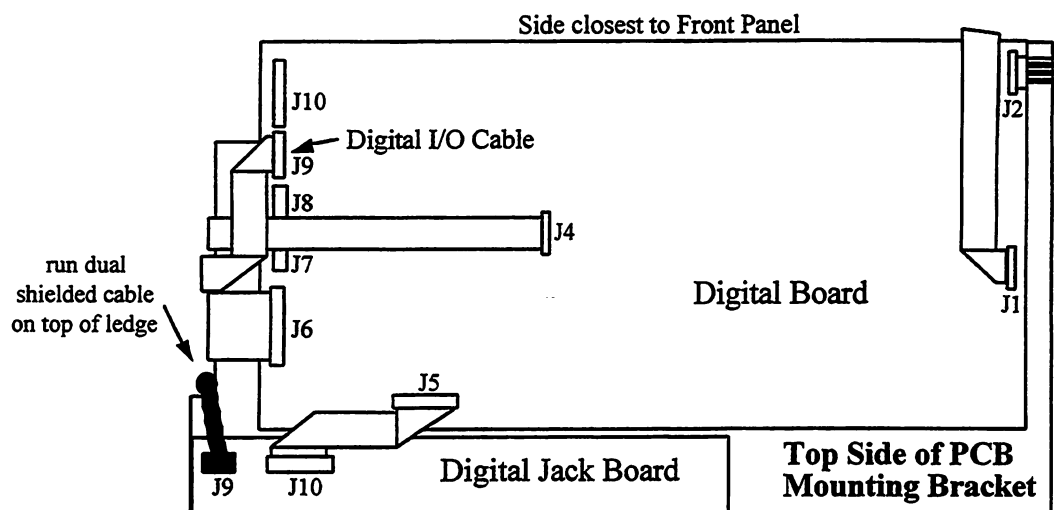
Top Side of the ASR-10 Rack PCB Mounting Bracket
